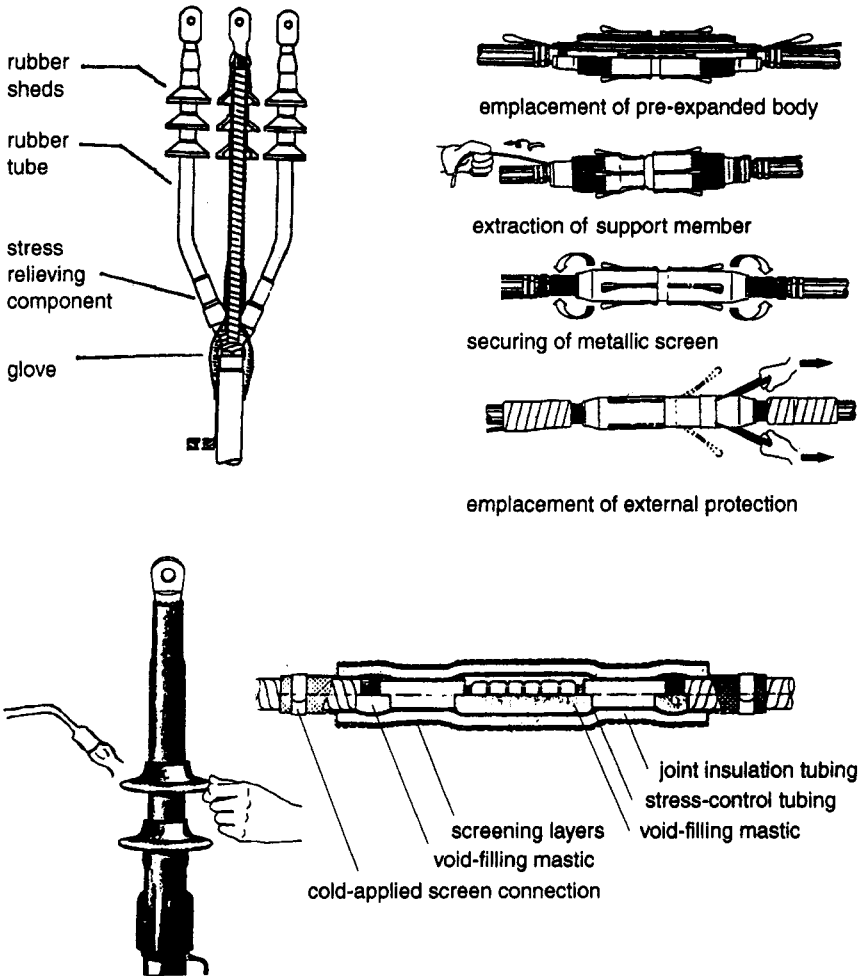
Some examples of MV polymeric accessories: elastic outdoor termination for paper (belted) cable; assembly of a carrier borne elastic rubber joint; assembly of a heat shrink termination; insulating components of a 24 kV joint
